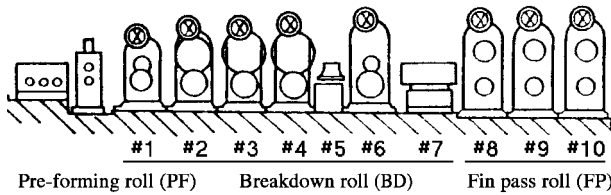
Step roll forming mill of NSC Hikari 24" ERW mill in 1976³⁾
